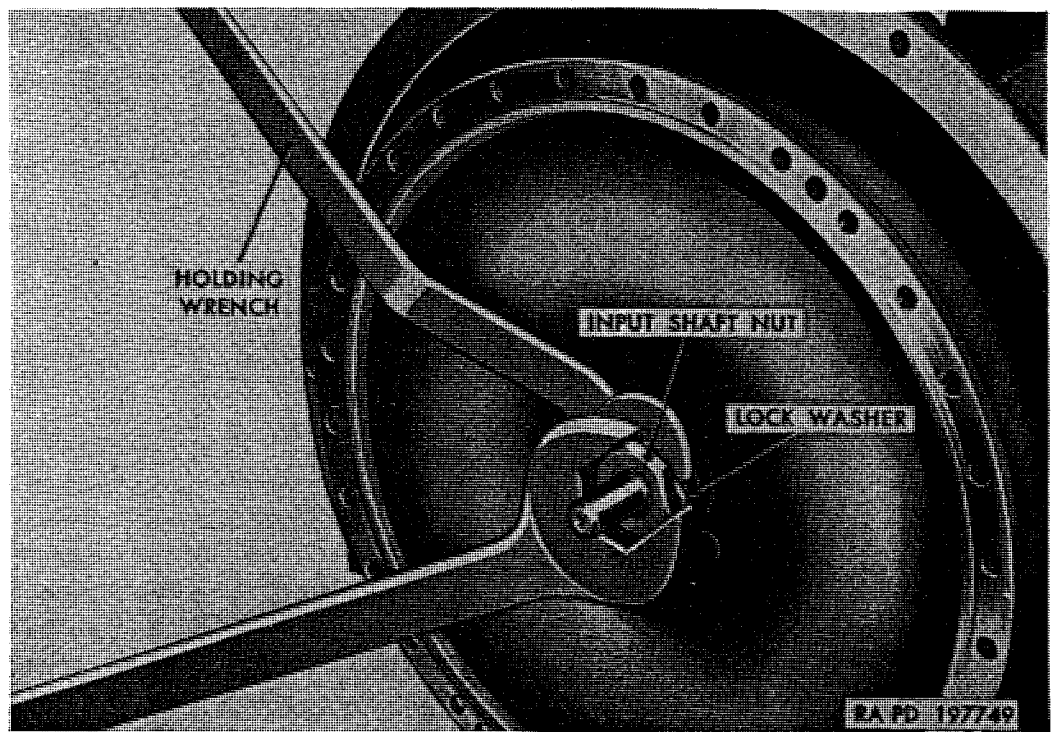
Using holding wrench B7950256 to hold fluid coupling.
